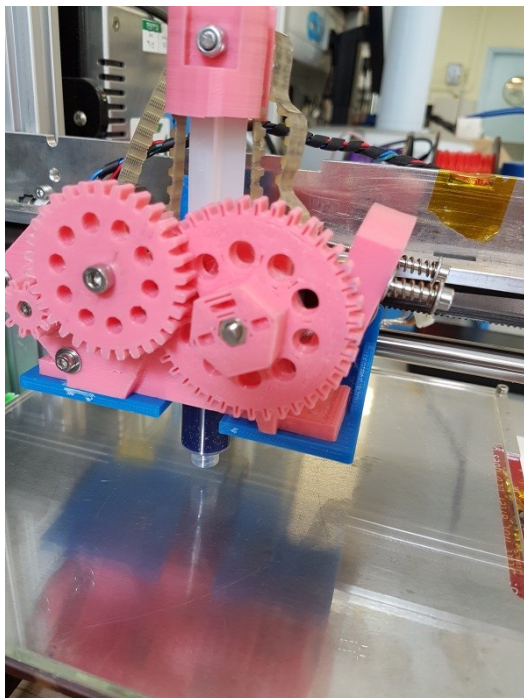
The syringe and gel loaded into the paste extruder ready to be extruded onto the printing bed.
